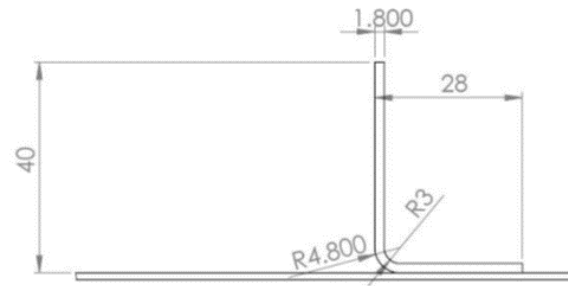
L-shaped stringer geometry (flange 1 is the horizontal one; flange 2 is the vertical one)
